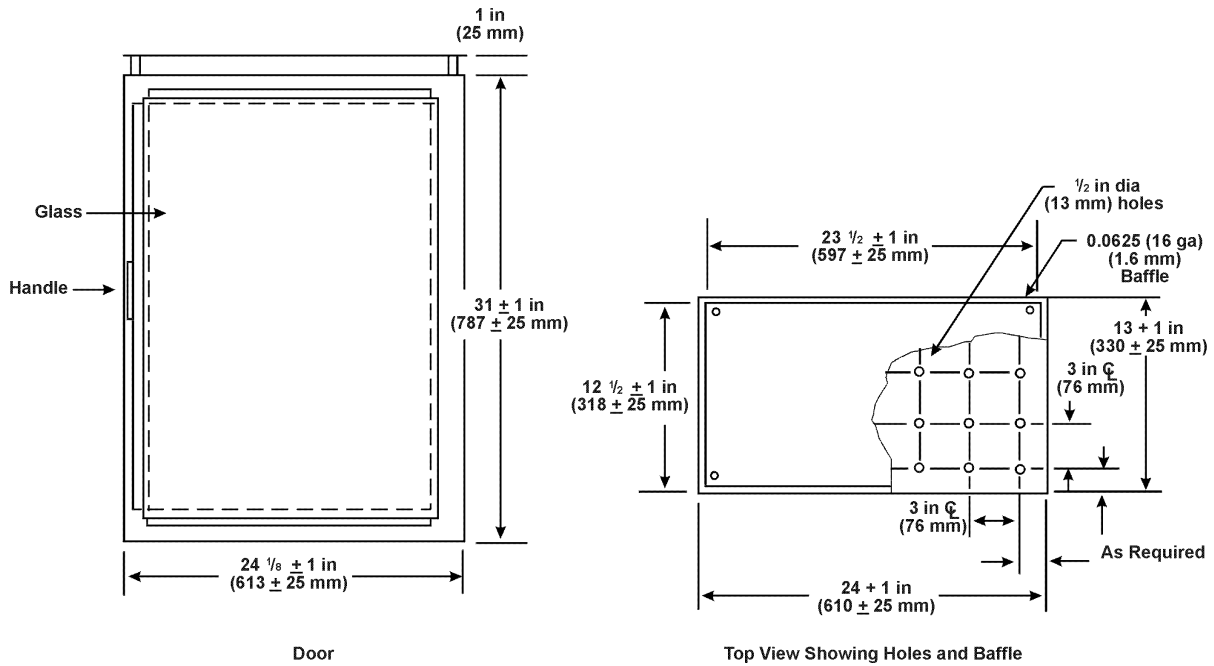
Front and Top View of Bunsen Burner Test Cabinet
